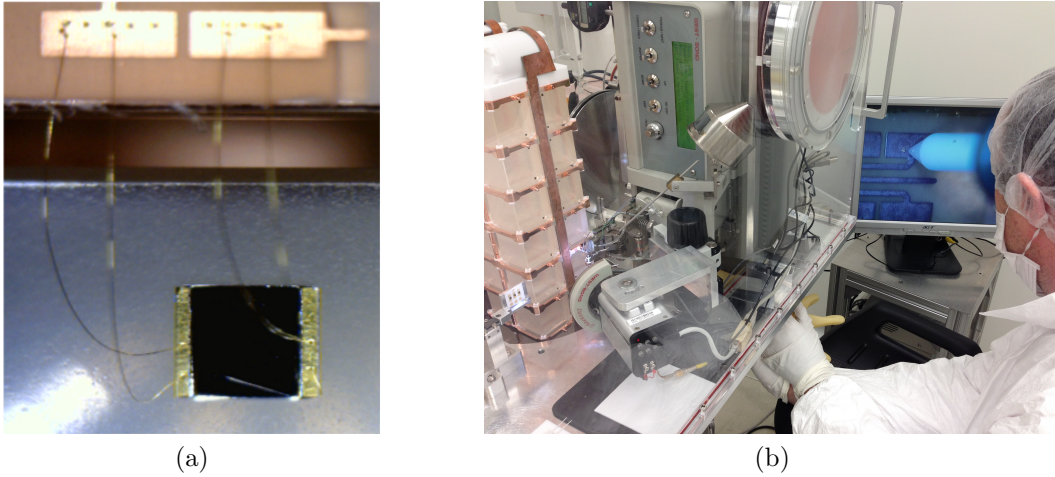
Close up photograph (a) taken during wiring bonding, and photograph of a bonding shifter (b) operating the bonding machine.
